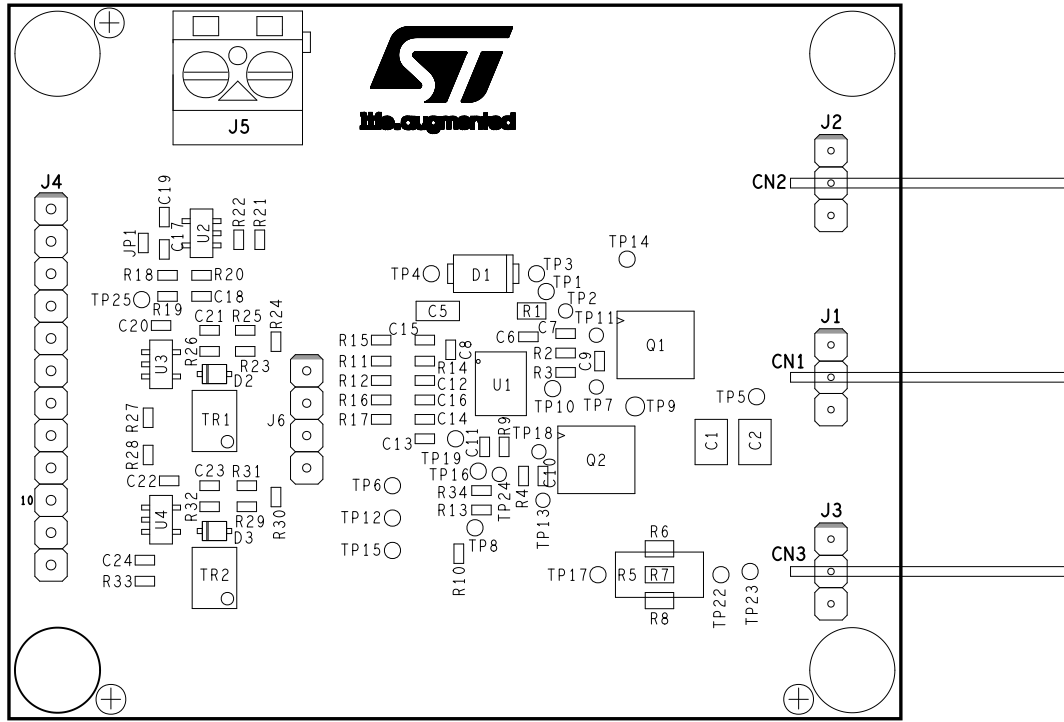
EVLSTDRIVEG611 - layout (component placement bottom view)
